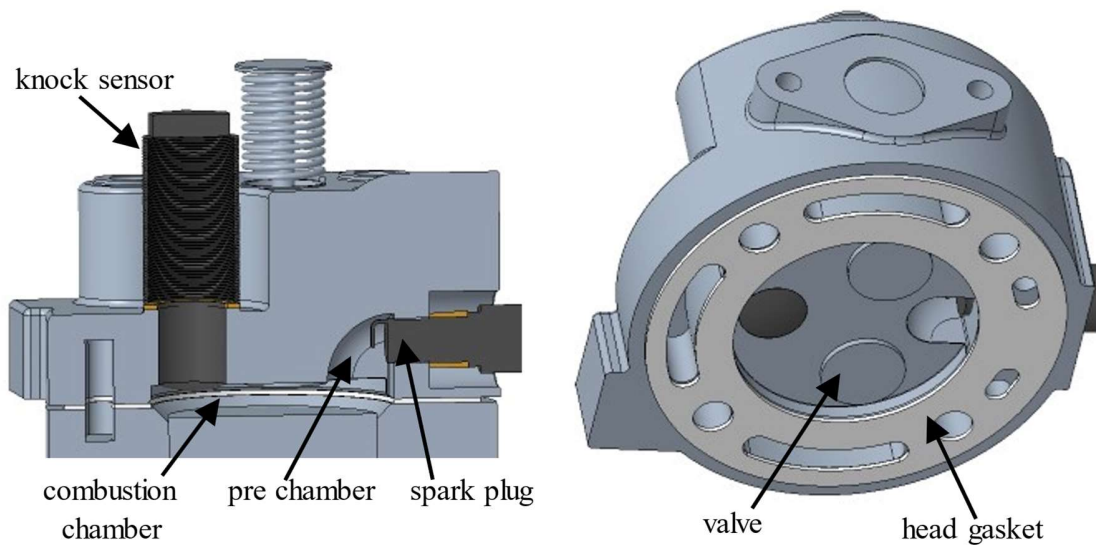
CAD model of the cylinder head. Left side cross section, right side view from below.
